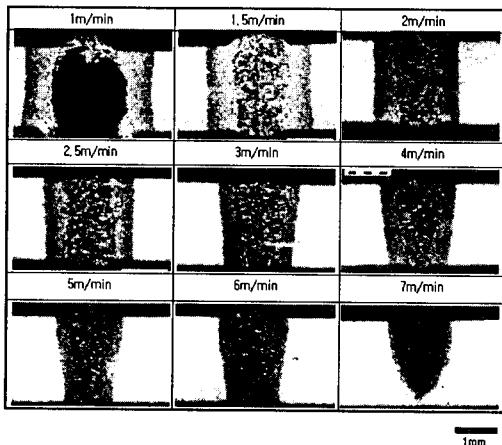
Variation of bead shape after laser welding with a various welding speed on SAPH370 steels.
